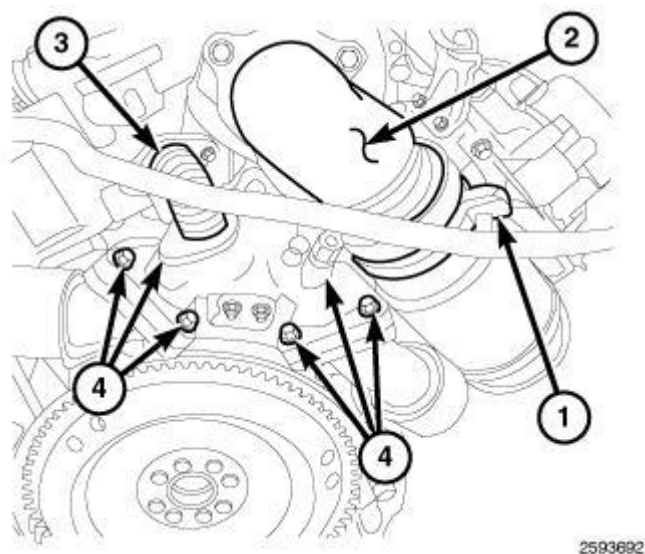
EXHAUST MANIFOLD ASSEMBLY
